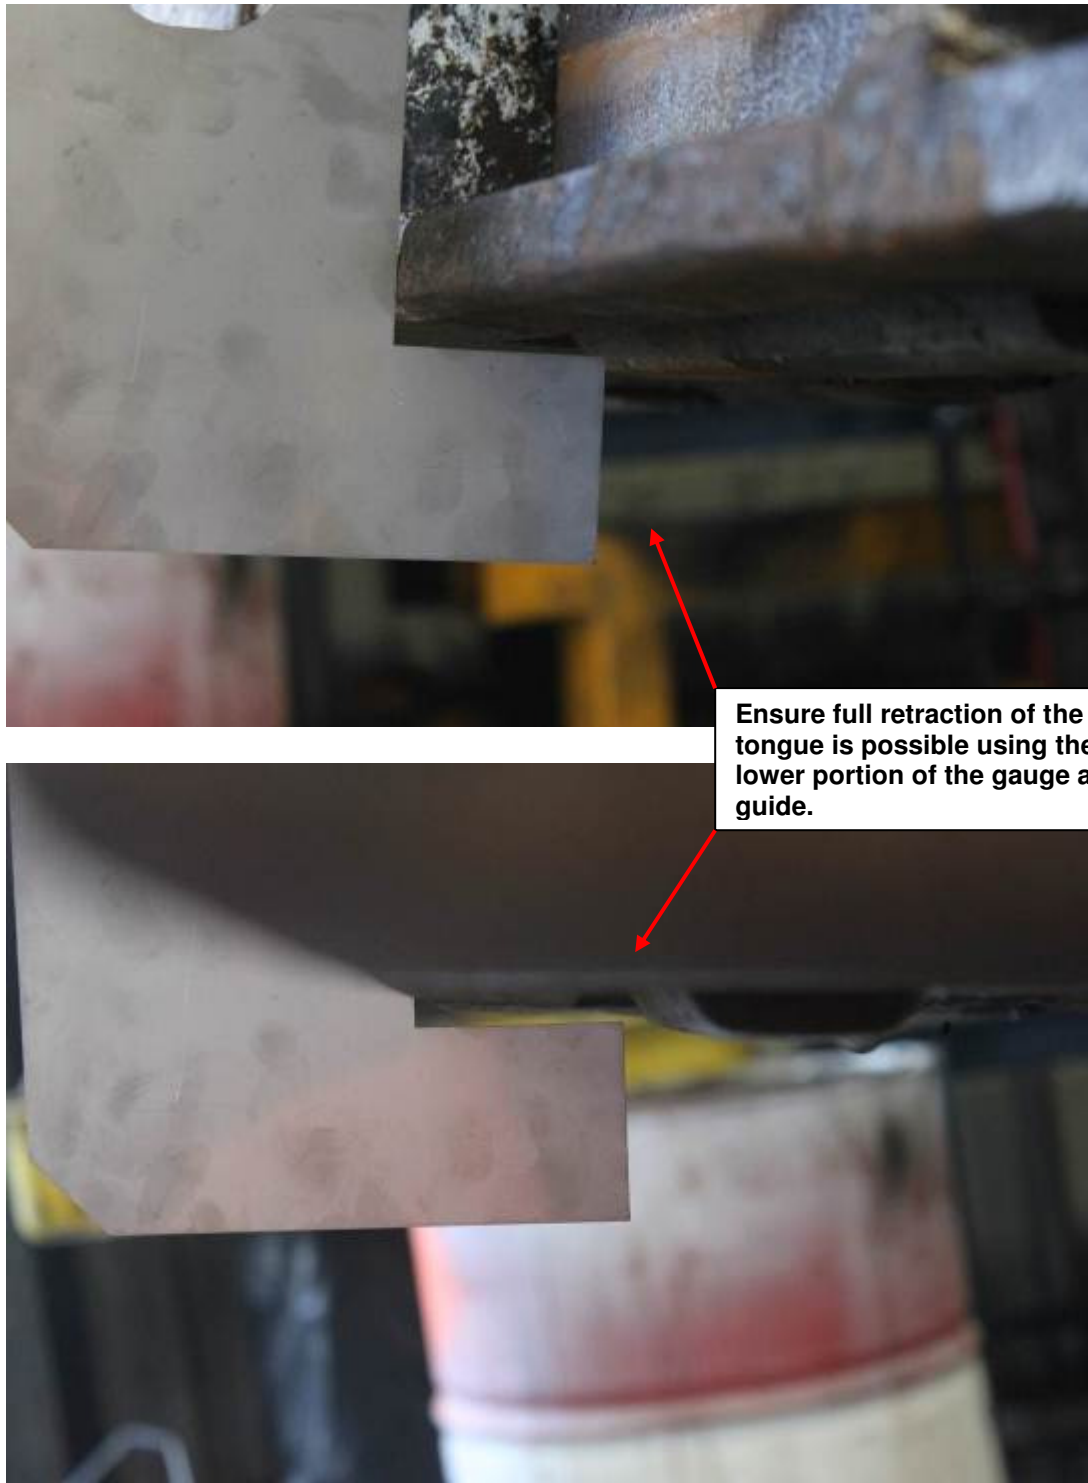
Checking QICS Tongue Retraction using Gauge Part No. 5-12170702
